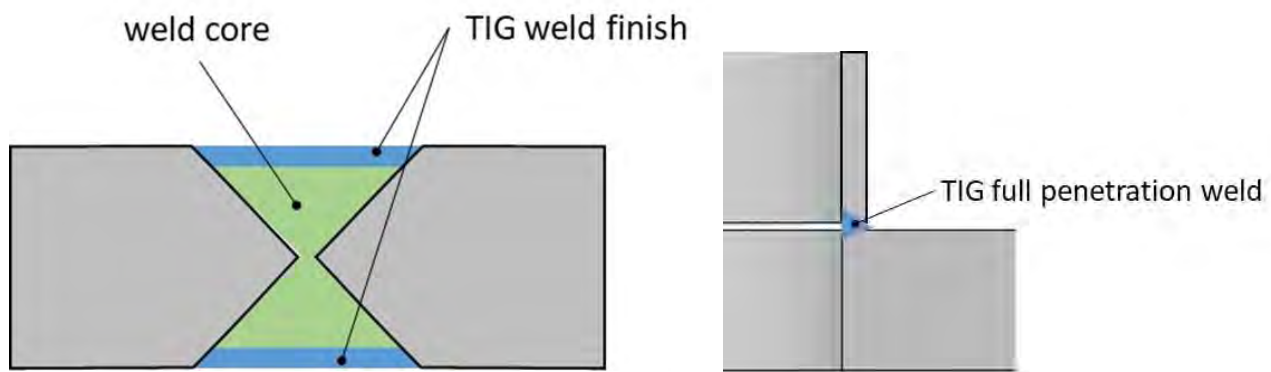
Left: Structural weld with TIG finish to be used for welding of the VV assembly,
